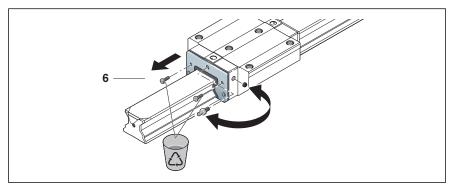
Mounting the FKM / NBR seal in size 25-55
